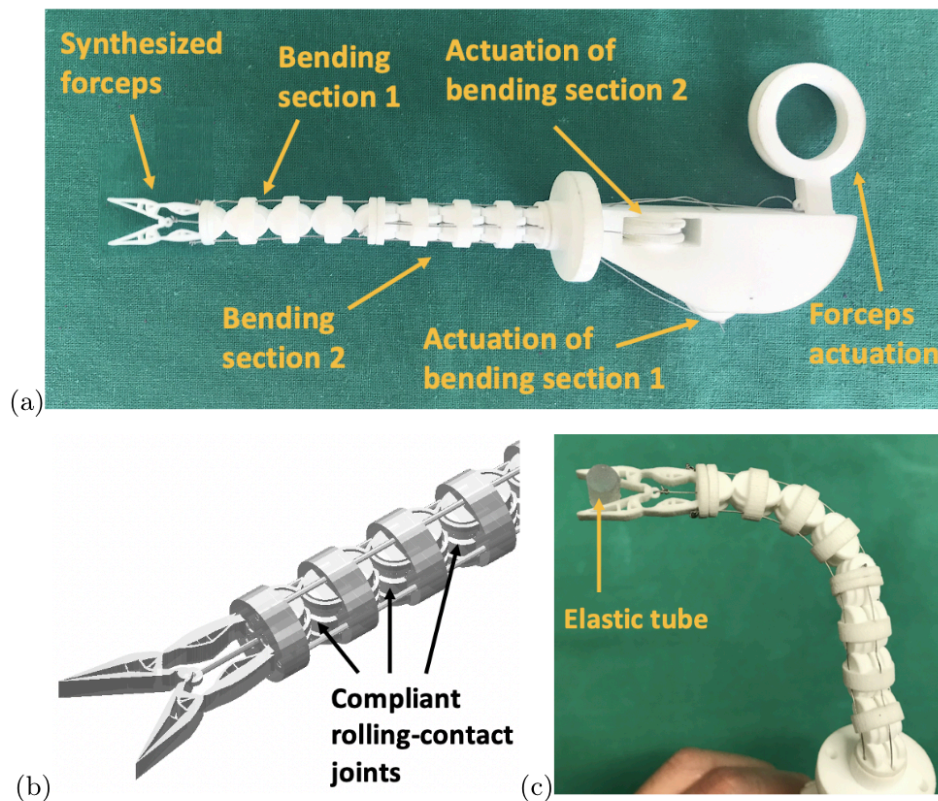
A 3D-printed continuum manipulator for robot-assisted MIS: a) The prototype of the manipulator, b) The 3D geometry of the bending section, c) Test of the performance of the manipulator by clamping an elastic tube.
